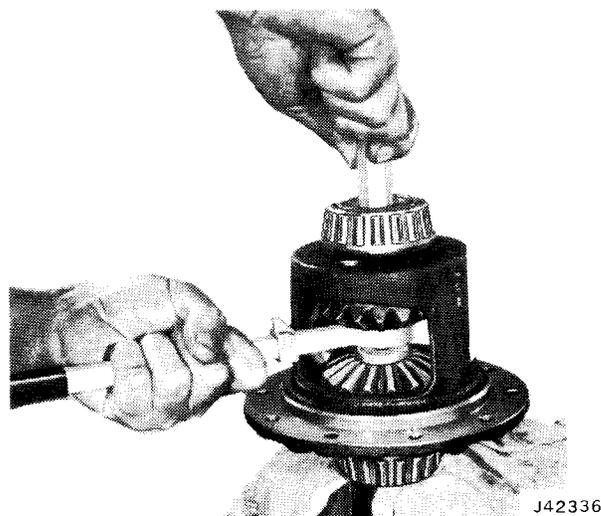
Threading Forcing Screw into Rotating Tool
